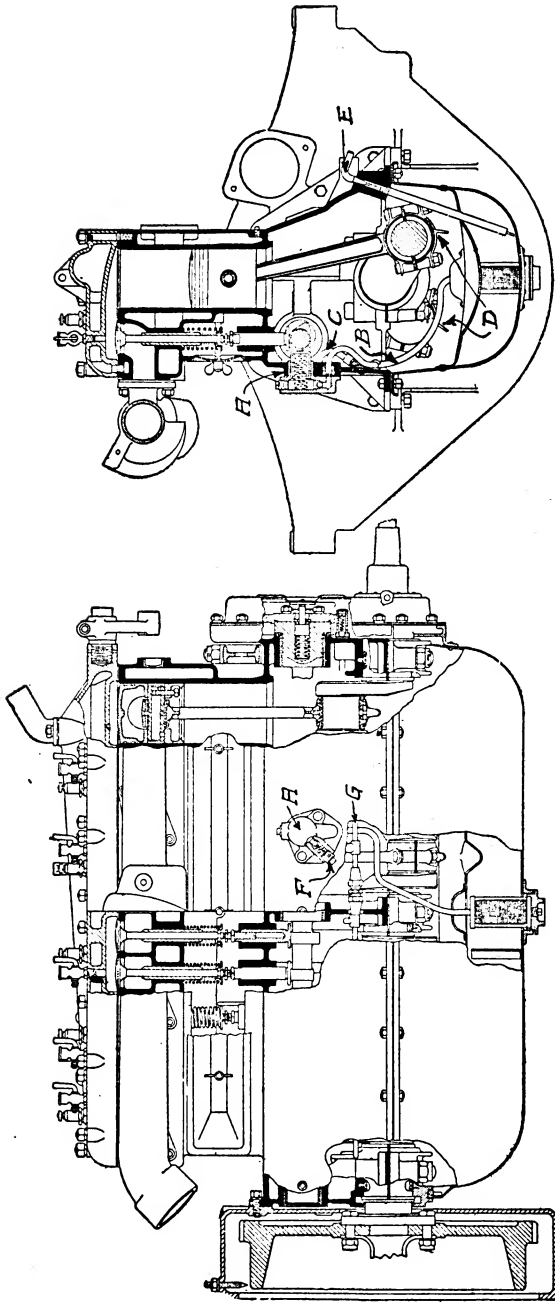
Side and End Sections of Engine with Horizontal Plunger Type of Oil Pump
